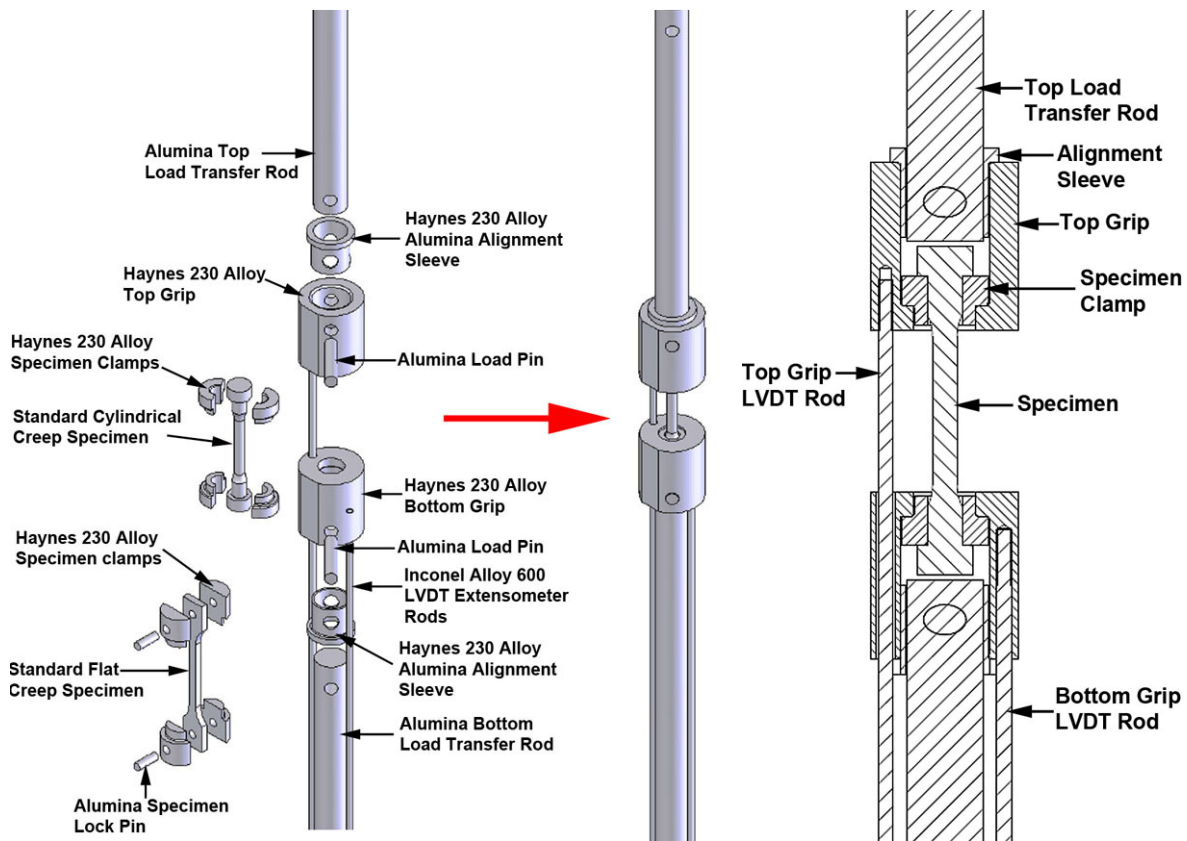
CAD drawings showing the design of the second generation creep sample grips.
